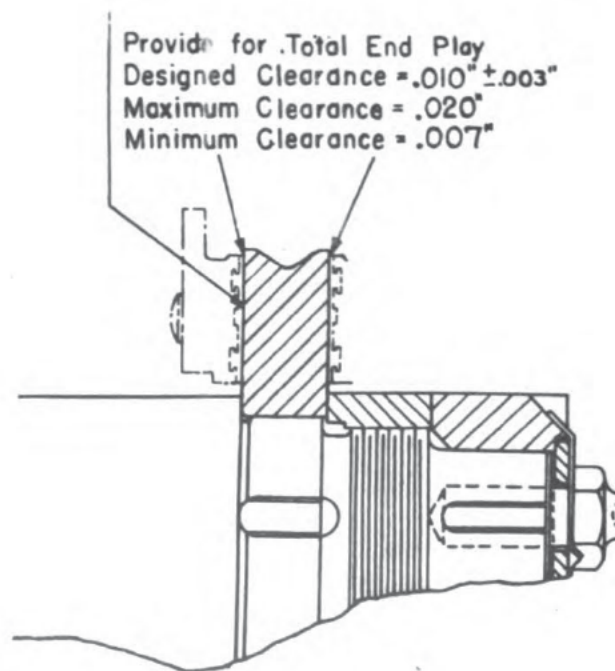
Assembly of thrust bearing and lower inner casing.
